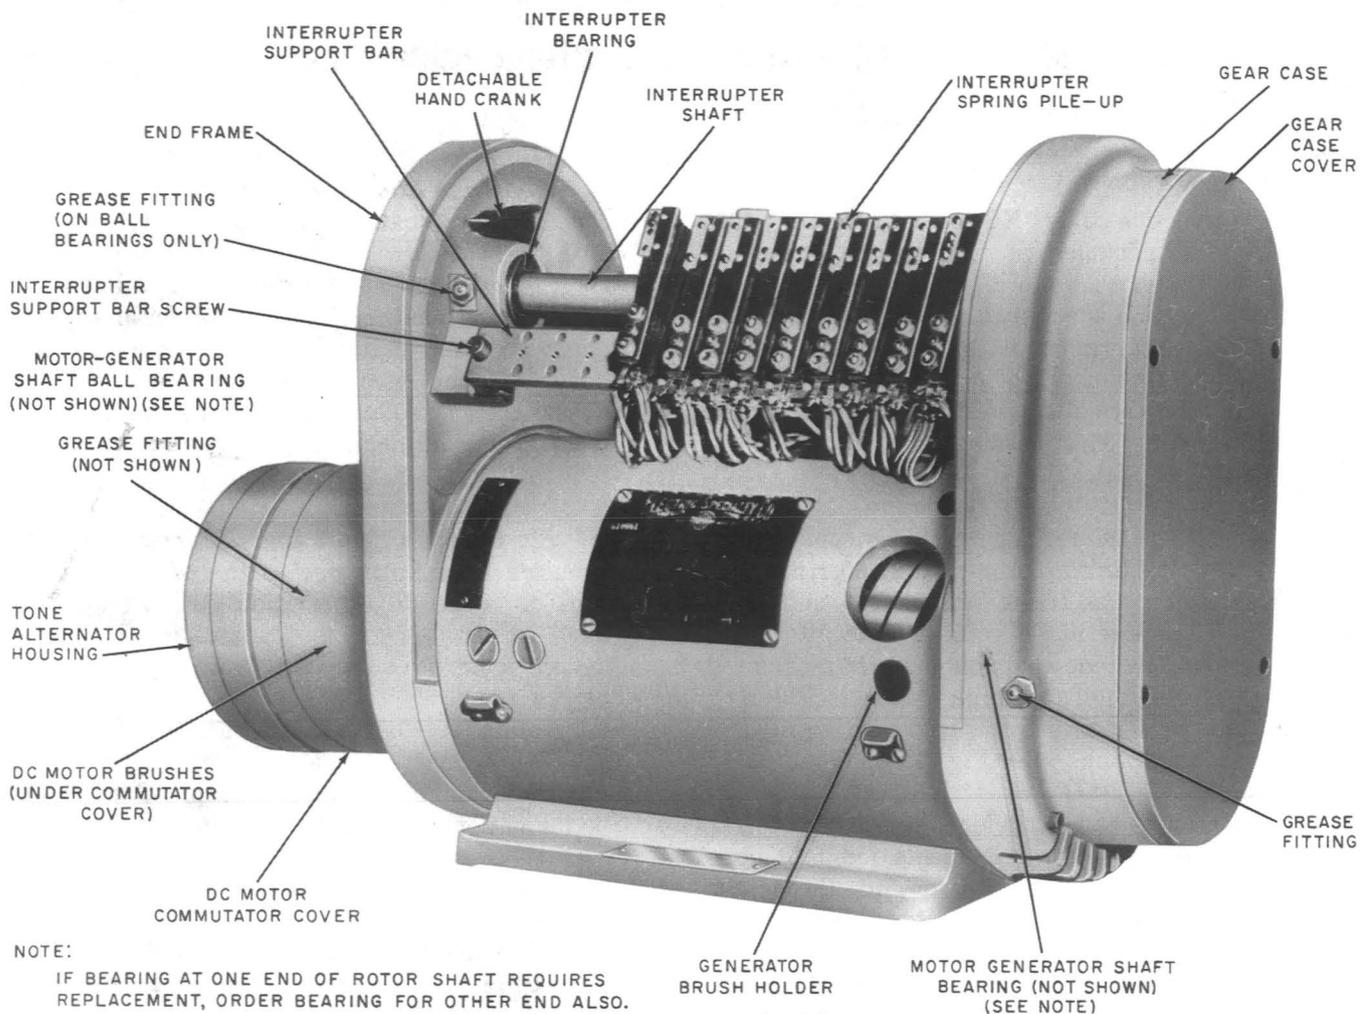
KS-15532 DC Motor-Driven Ringing Machine-Interrupter Cover Removed-Tech Systems Company (formerly Electric Specialty Company)
